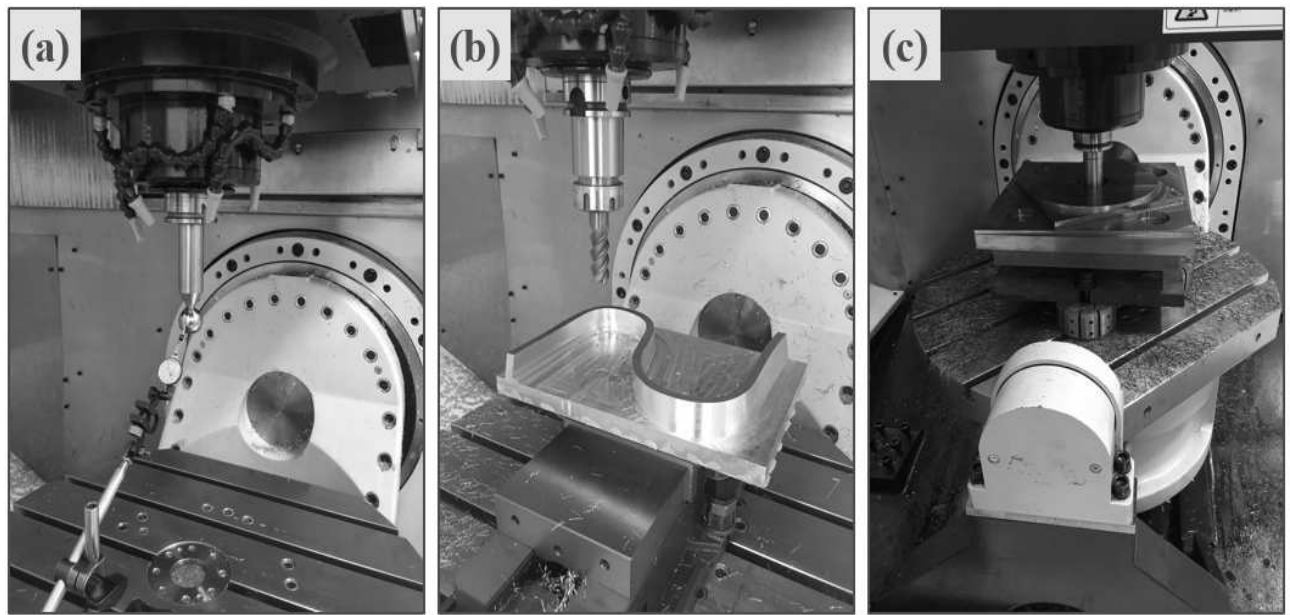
Linkage test of "baby hanging basket" five-axis precision machine tool
